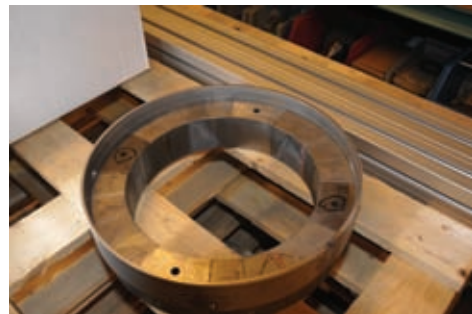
One of the five identical 50 mm pieces of the outer magnet inside an outer stainless steel casing.
